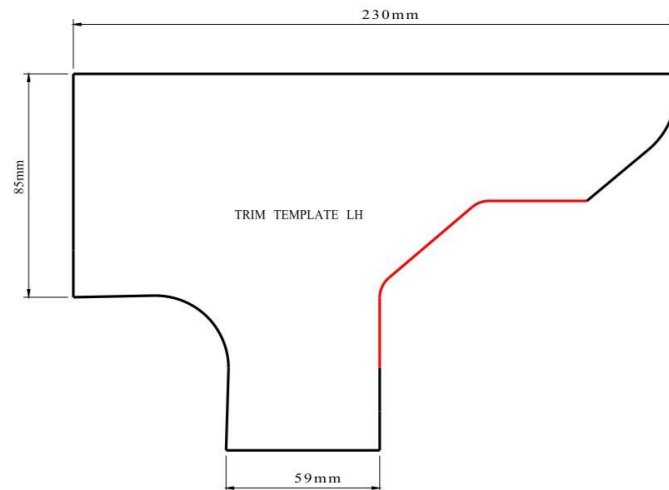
Example (not in scale) of the printable template and its reference dimensions (mm)
